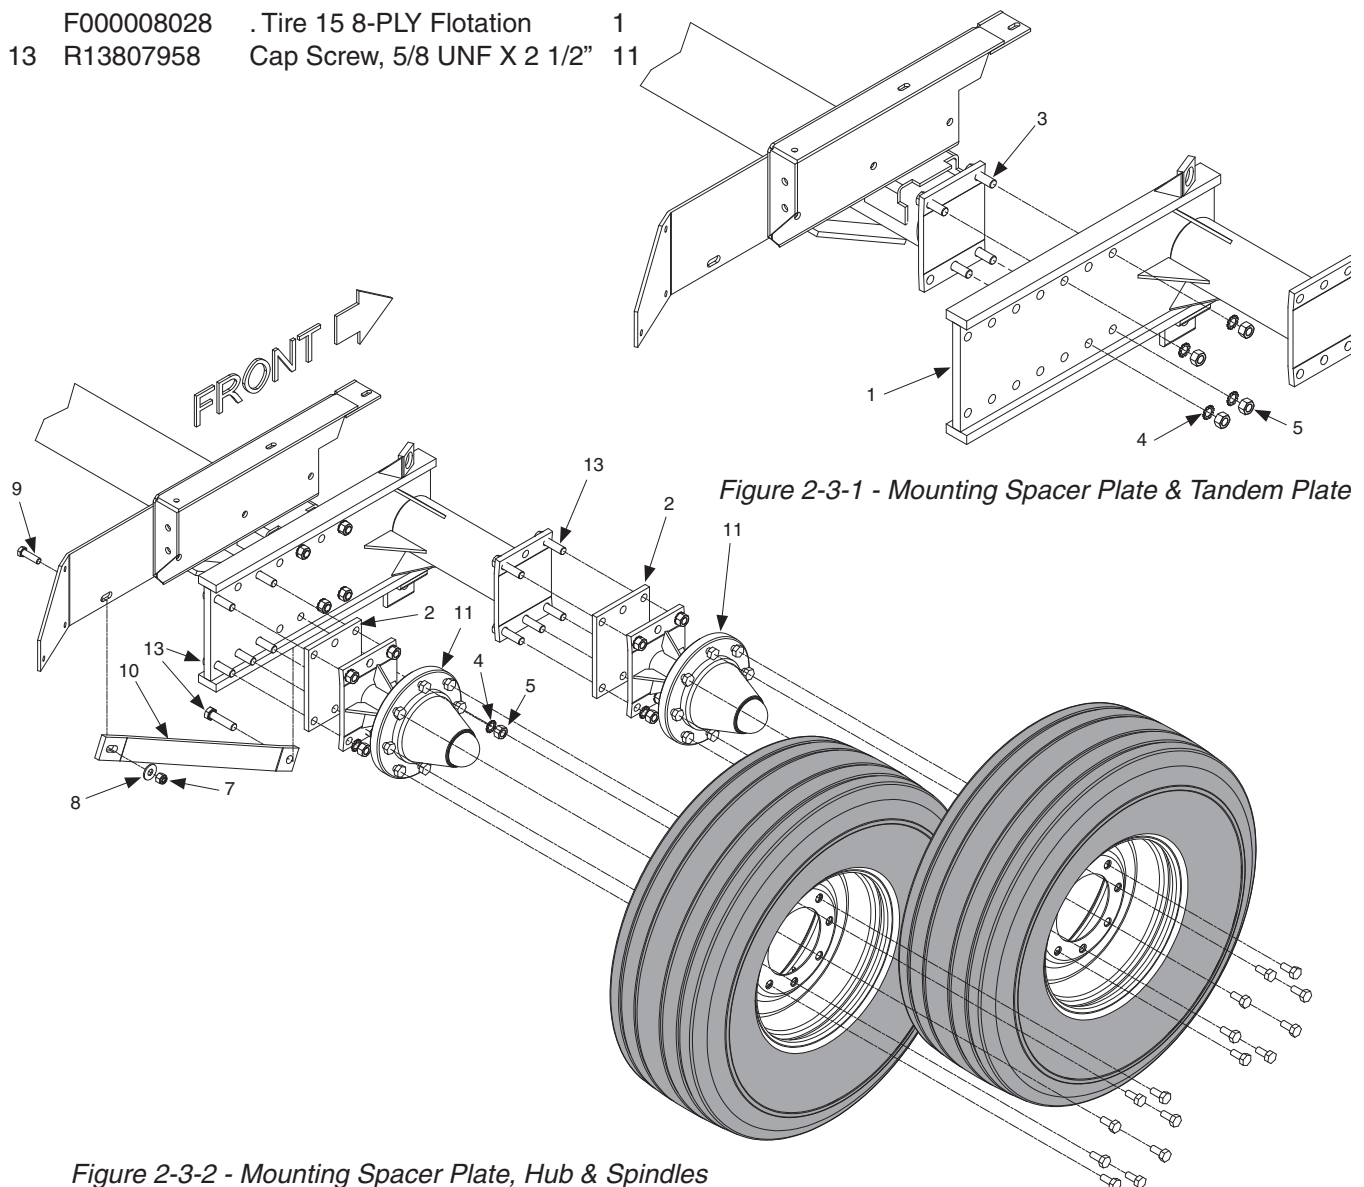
Mounting Spacer Plate & Tandem Plate
